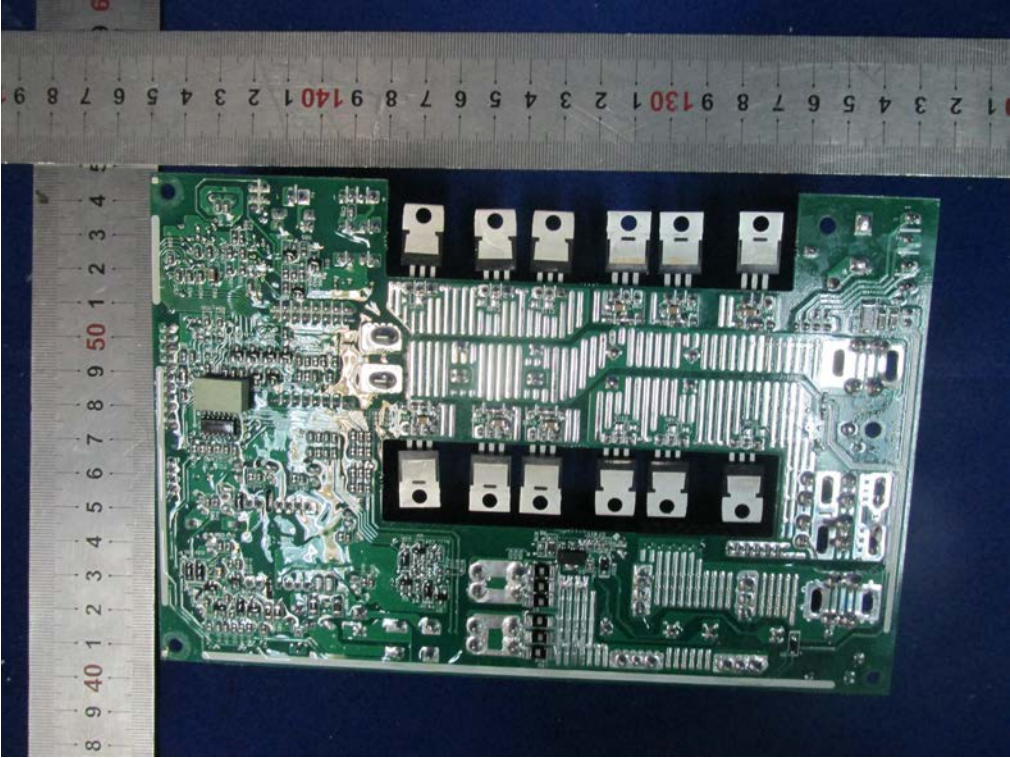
FlinInfini Lite 5kW-48V PCB of MPPT charger board trace view
